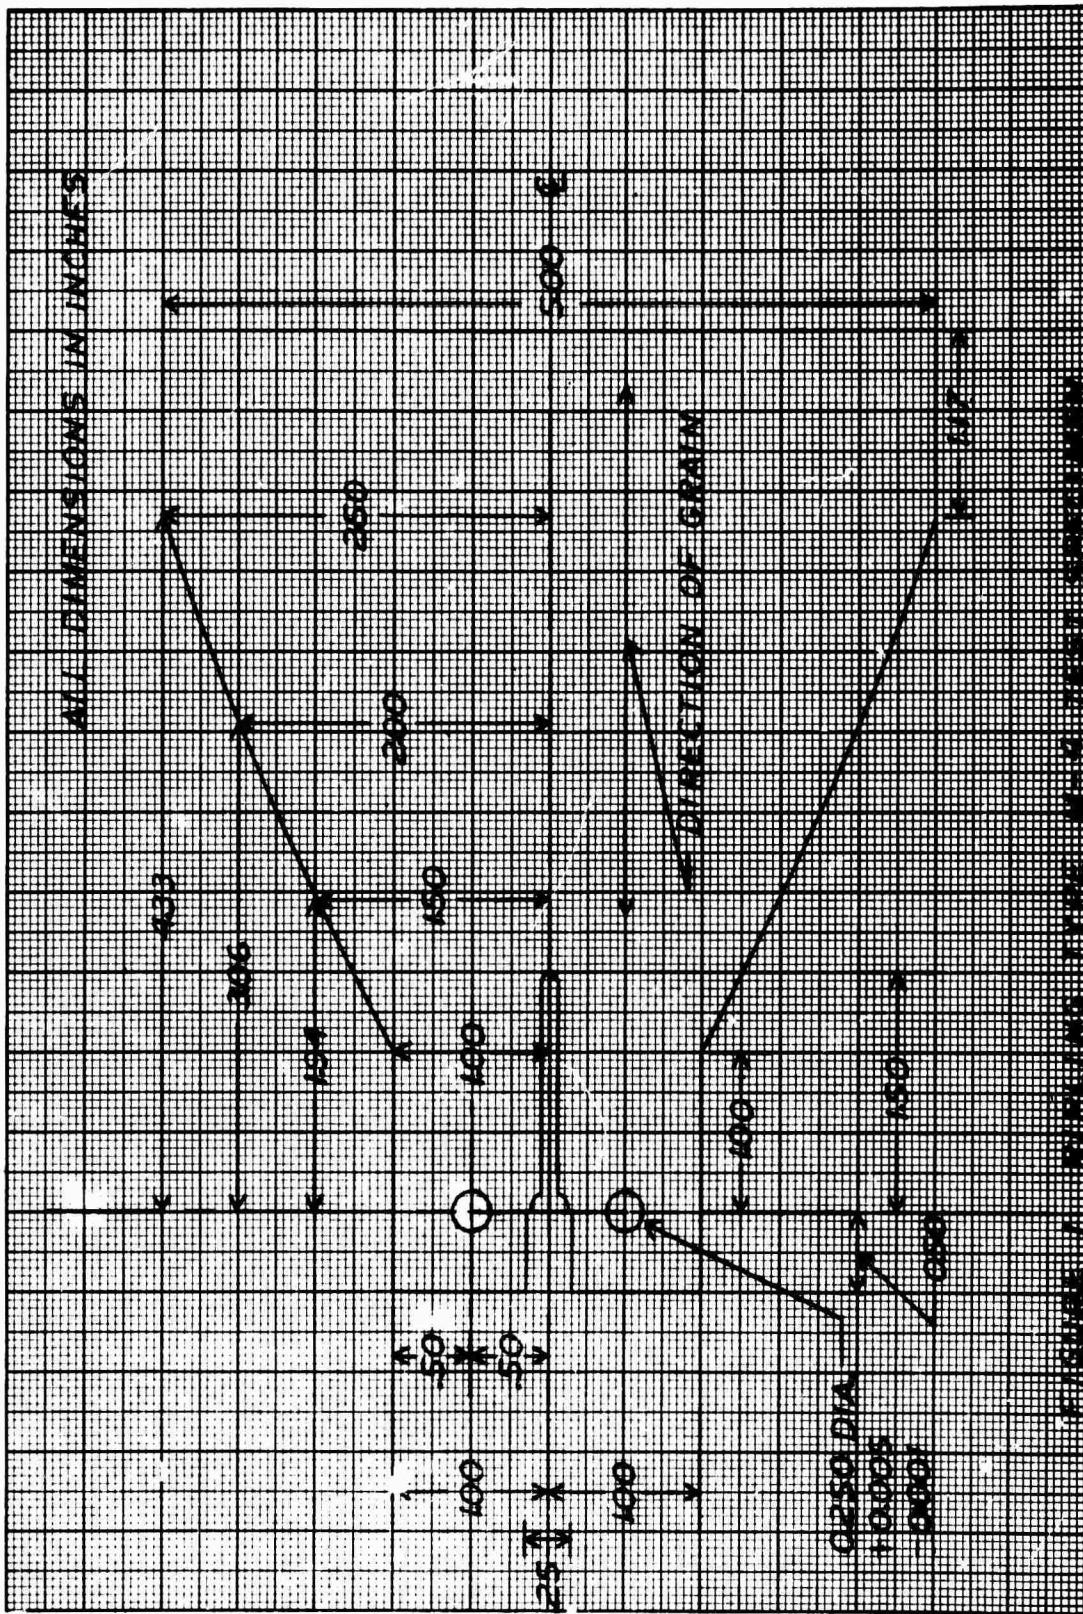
PUNCHING TYPE M-Q TEST SPECIMEN
